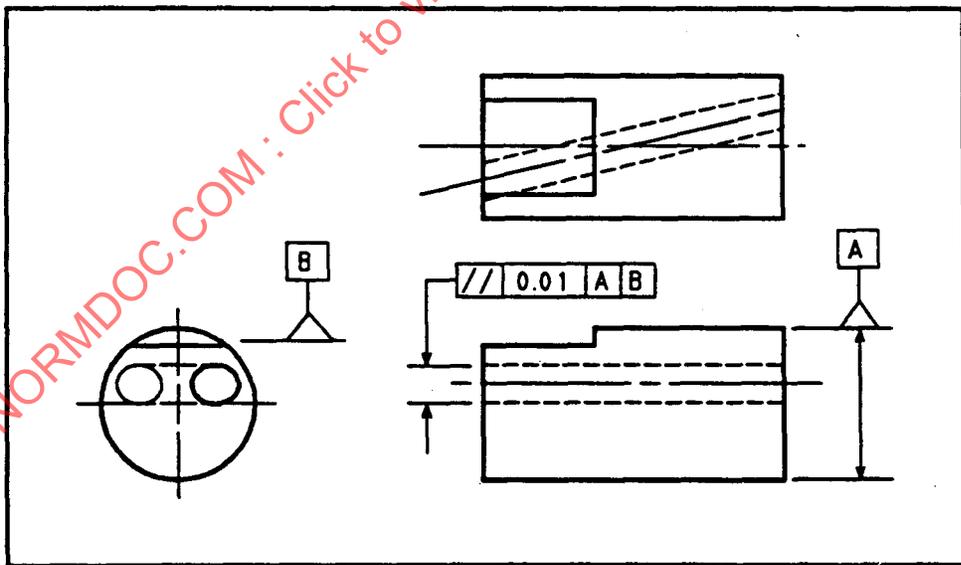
PLANAR PARALLELISM OF AN AXIS; PRIMARY DATUM AXIS; SECONDARY DATUM PLANE CONTROLS ROTATION OF THE TOLERANCE ZONE ABOUT THE PRIMARY DATUM AXIS
